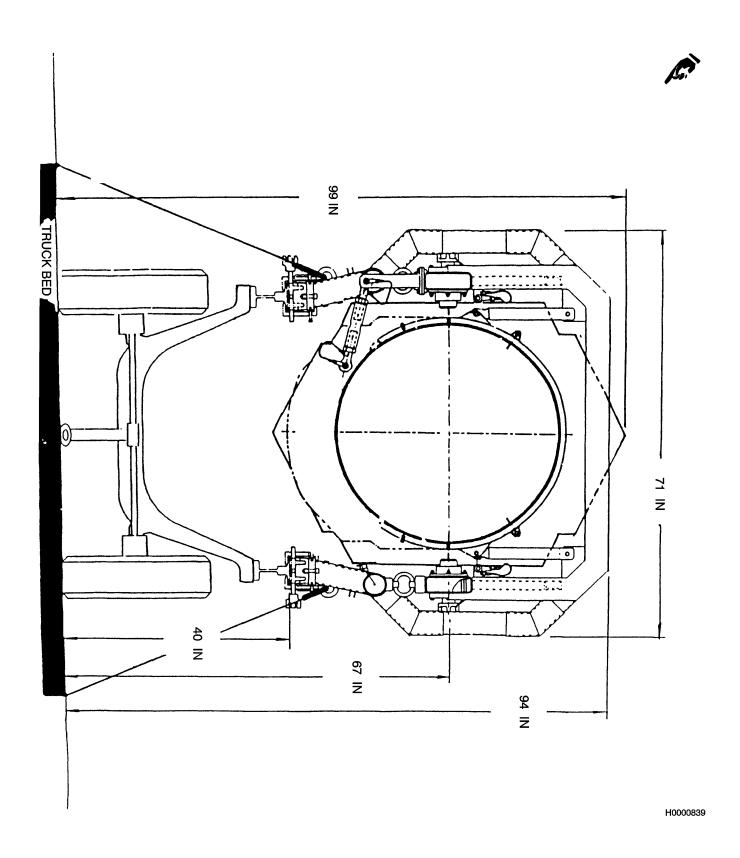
F119/ESS/3000E Overall Dimensions and Truck Tiedown Configuration - Front View
